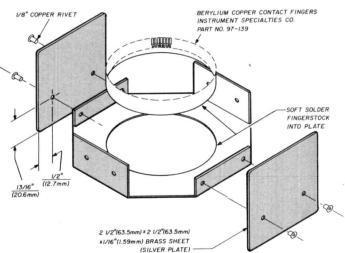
Anode collet and capacitor plate support assembly. The two fixed capacitor plates for C5 and C6 are mounted to the assembly using copper pop-rivets and then soldered. The two remaining bent-up edges are for mounting the blocking capacitors C3 and C4. The finger-stock is soft-soldered into the large hole in the center. A tight fitting aluminum disc helps to hold the finger stock in place while soft soldering with a hot plate.
